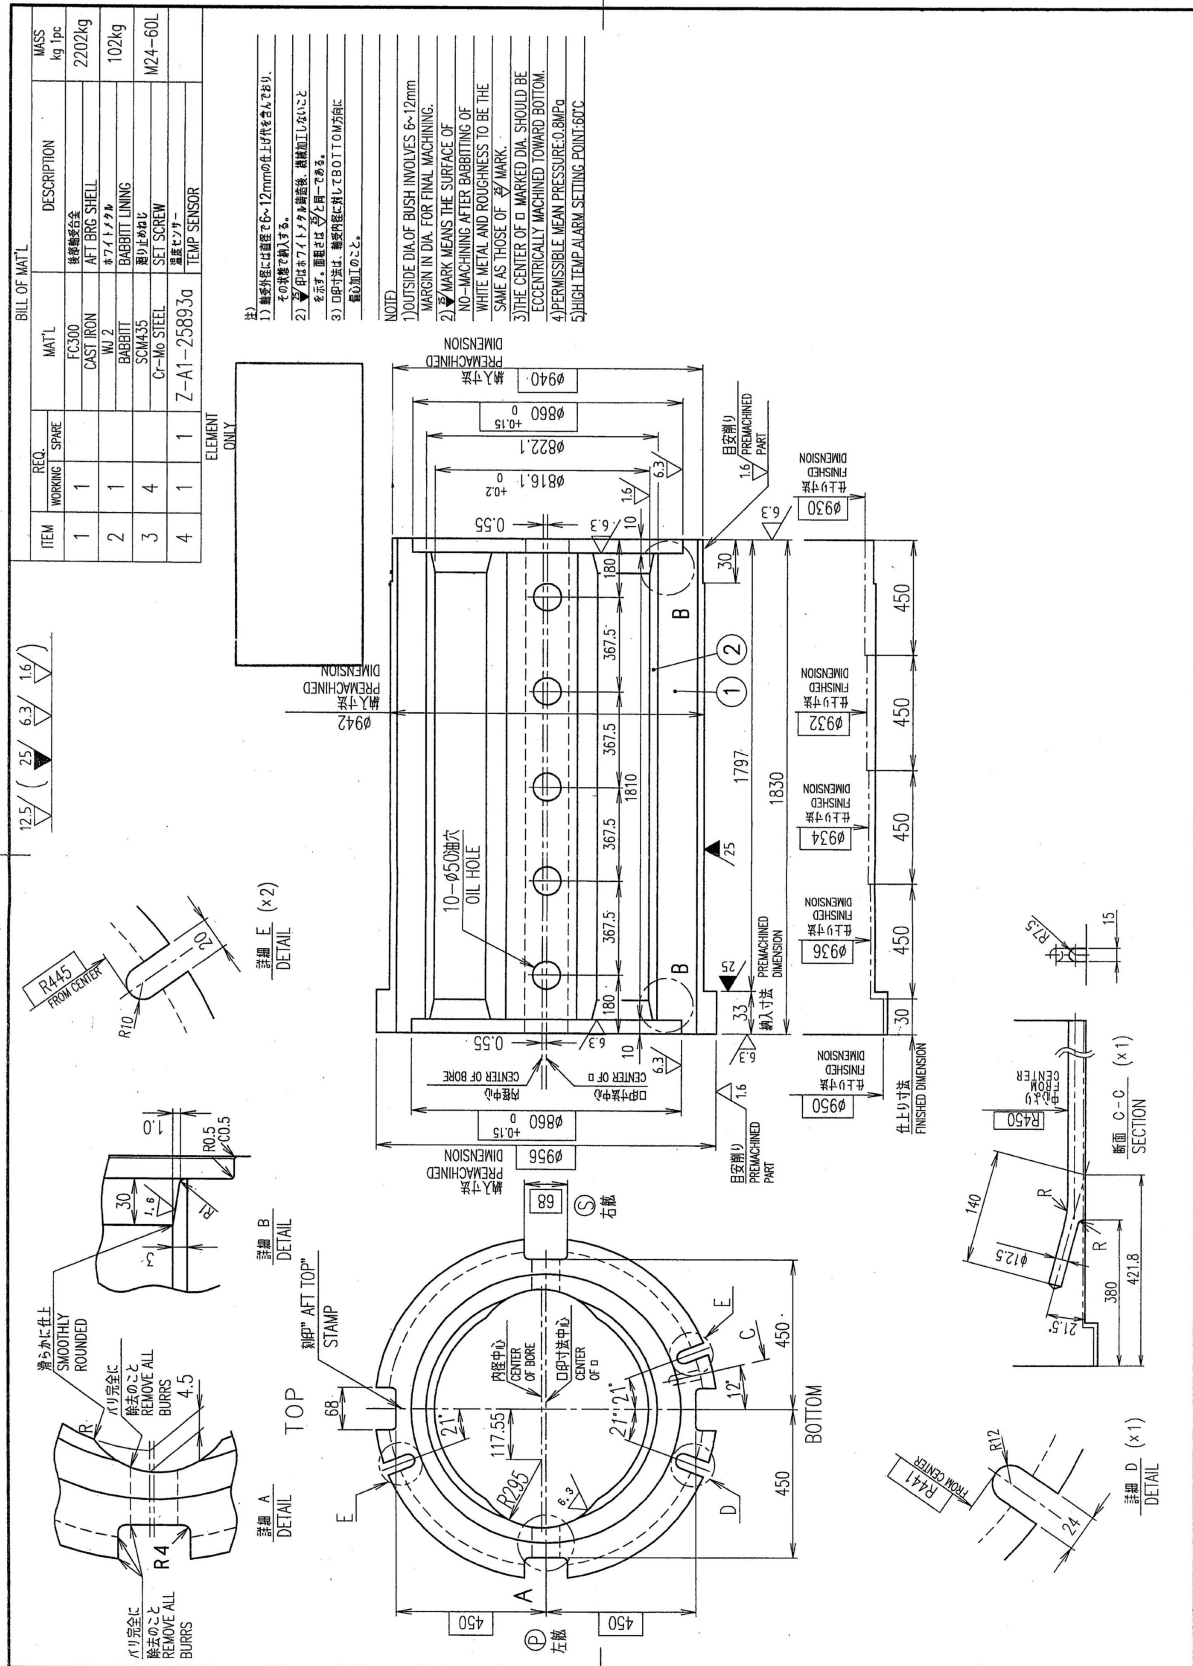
AFT STERN TUBE BEARING DRAWING
